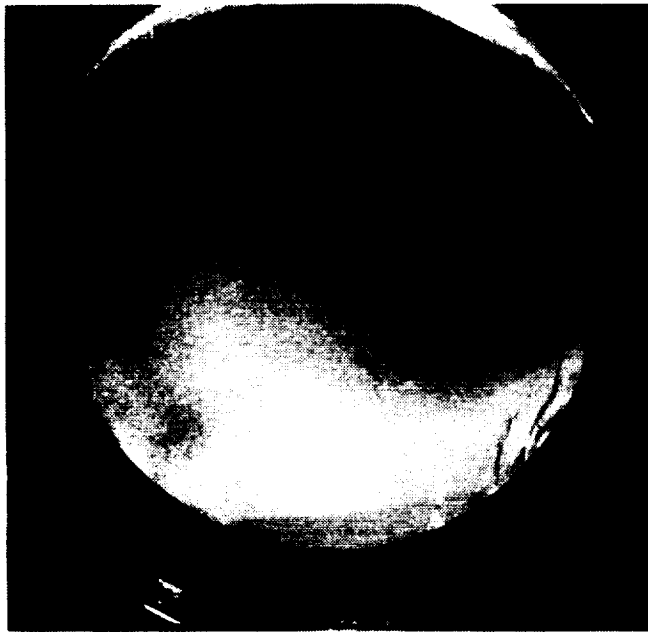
Fracture surface of Kyocera Si_3N_4 rotor 0004-3 broken in load test (5.3 ksi stress). Origin is located at large black arrow.
